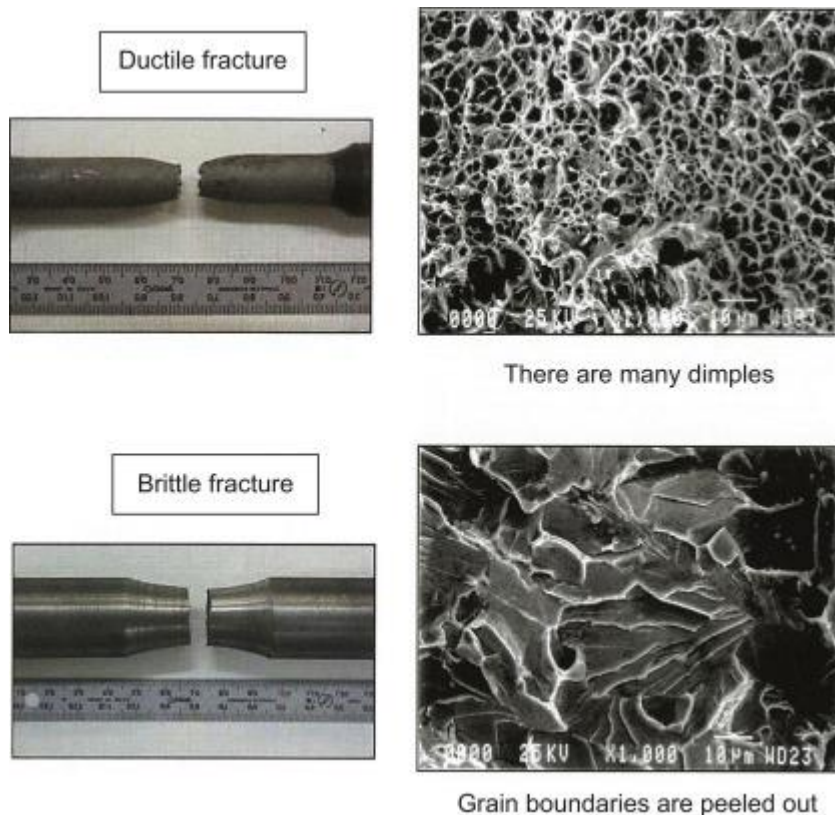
Tensile specimens which have fractured through ductile and brittle fracture mechanisms (Enomoto, 2017).
